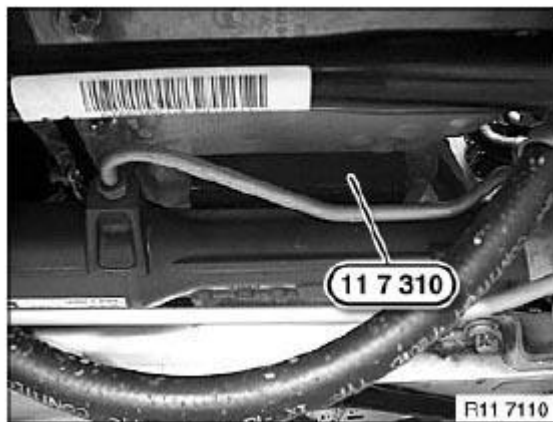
Identifying Special Tool 11 7 310 For Supporting Engine
